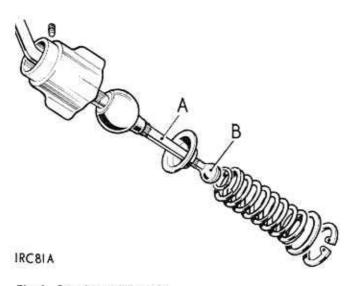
Gear lever assembly A—Gear change lever B—Ball end
